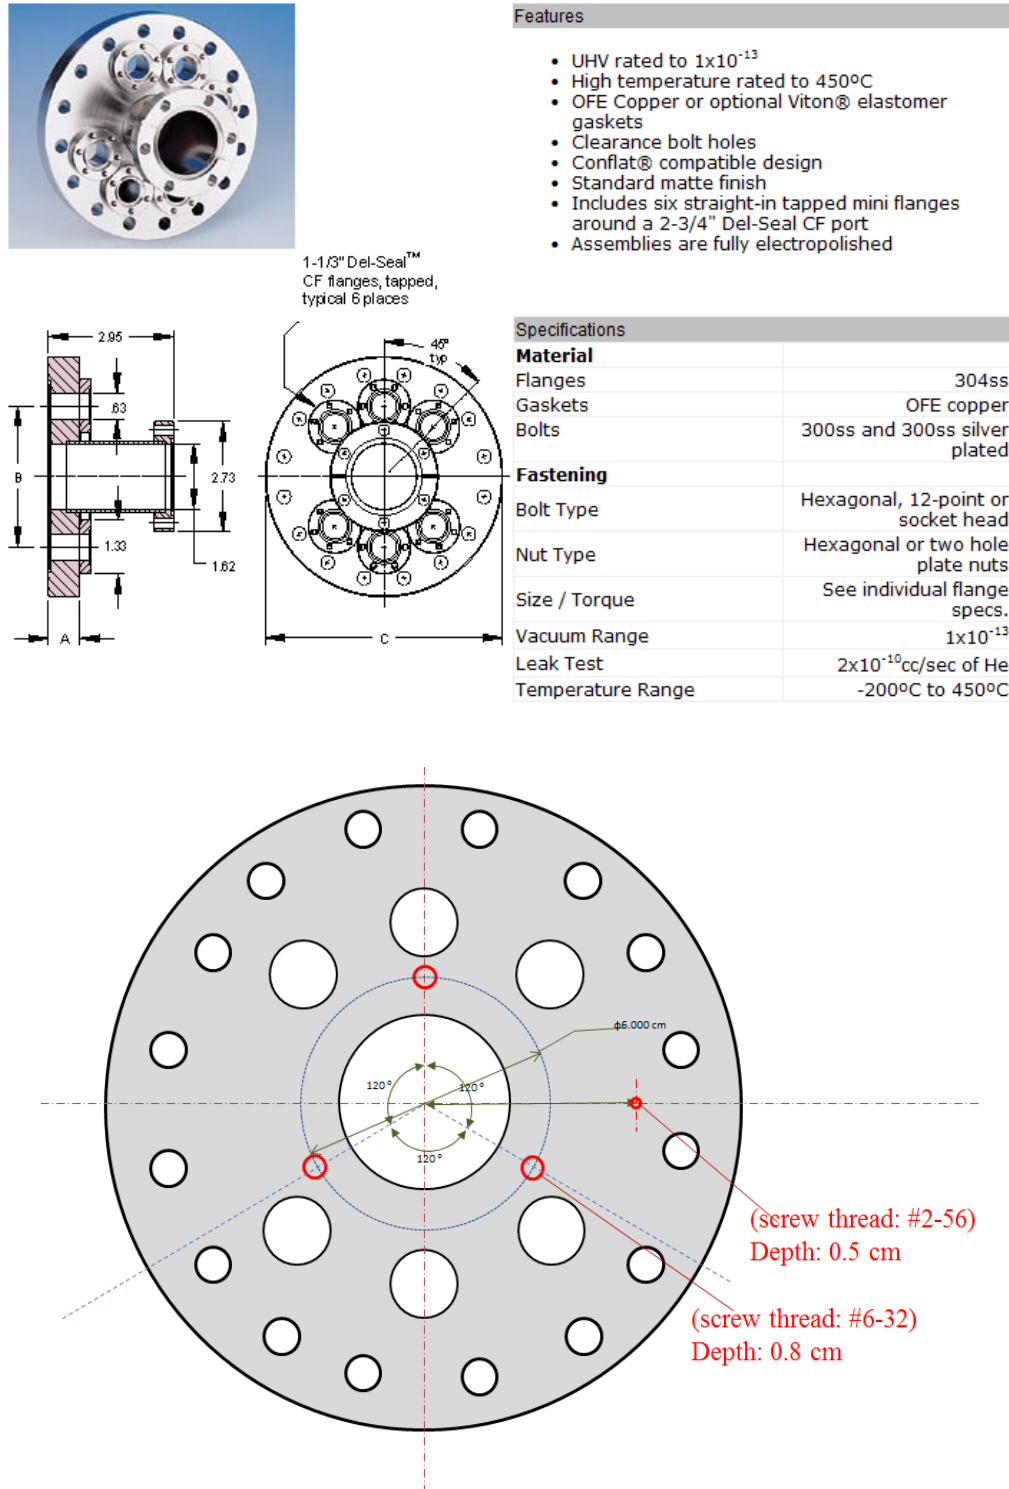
Multiport flange drawings from the manufacturer website.
